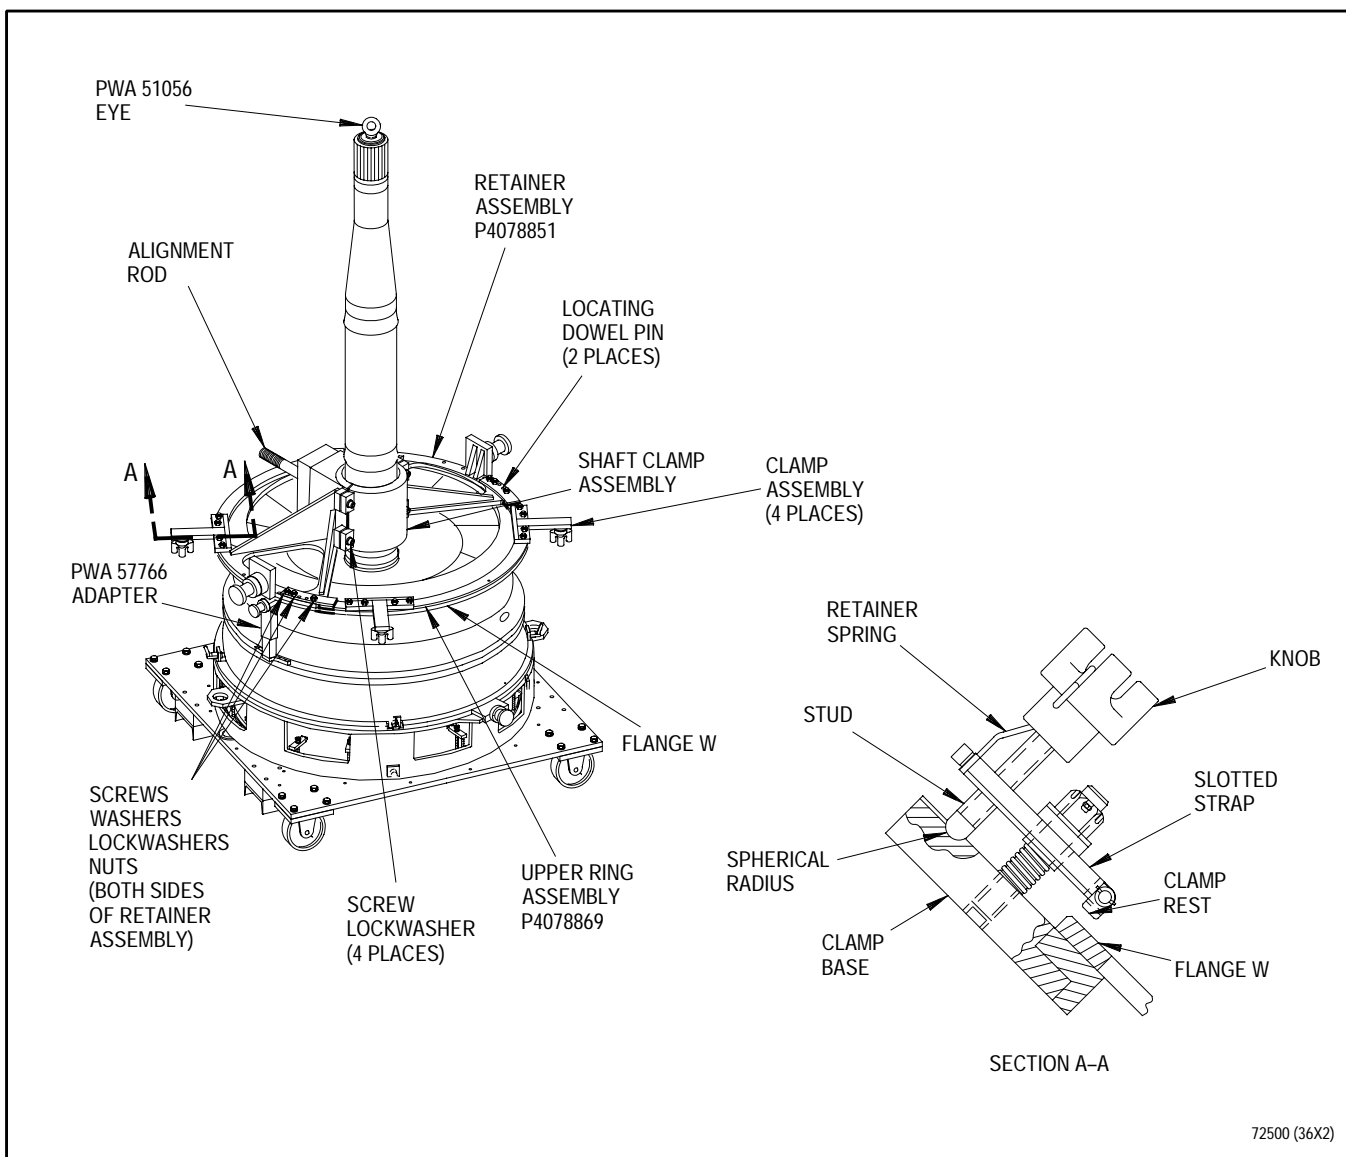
Installation of P4078875 Retainer Assembly onto Fan Drive Turbine Module
